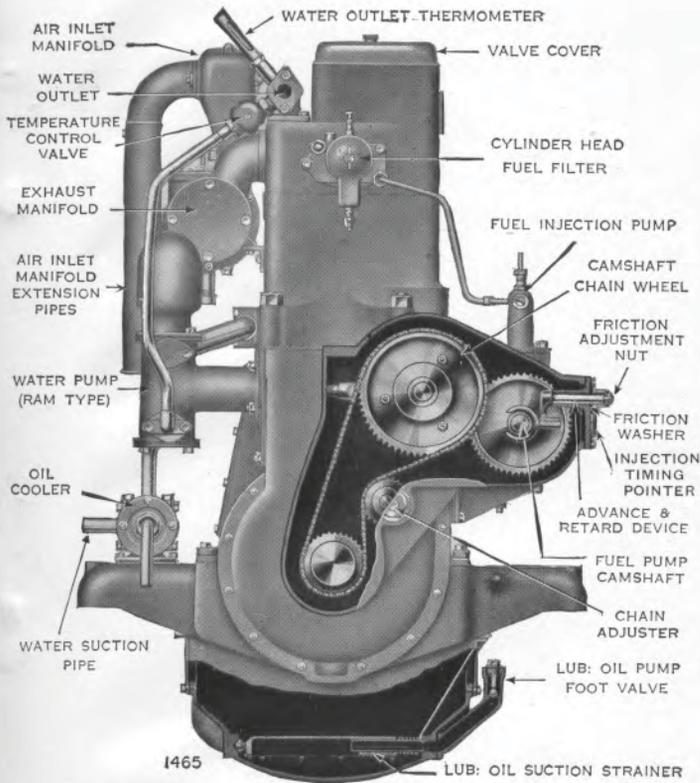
FORWARD END VIEW SHOWING CHAIN CASE ARRANGEMENT
